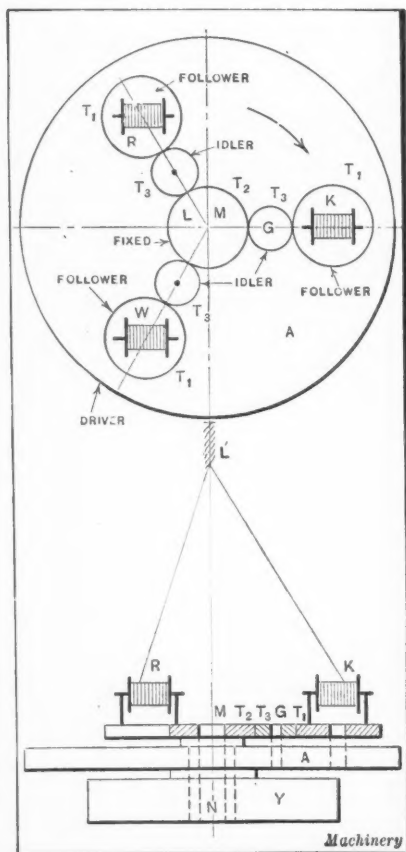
Diagram illustrating Use of Planet Wheel as Follower on Rope-making Machine
